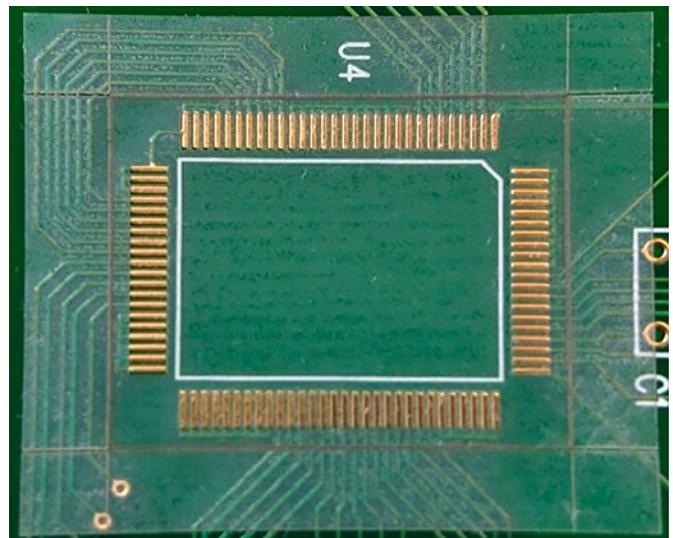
Adhesive-backed stencil aligned and placed onto PCB (IPC 7711 Method 5).
